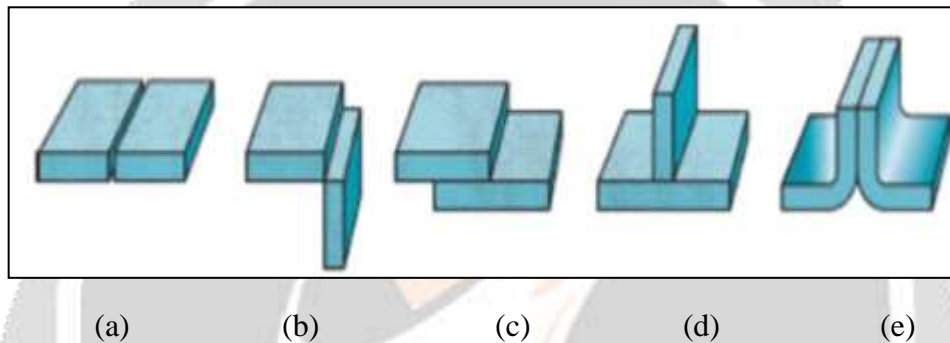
Types of Welded Joints: (A) Butt (B) Corner (C) Lap (D) Tee (E) Edge
